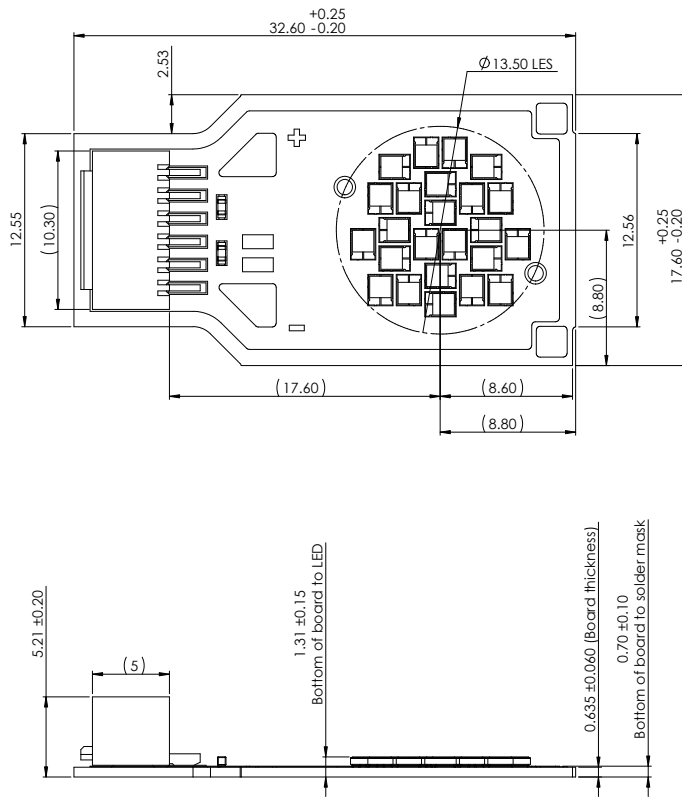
Package outline drawing for LUXEON S3000 / LXSx-Pxxx-0024.
